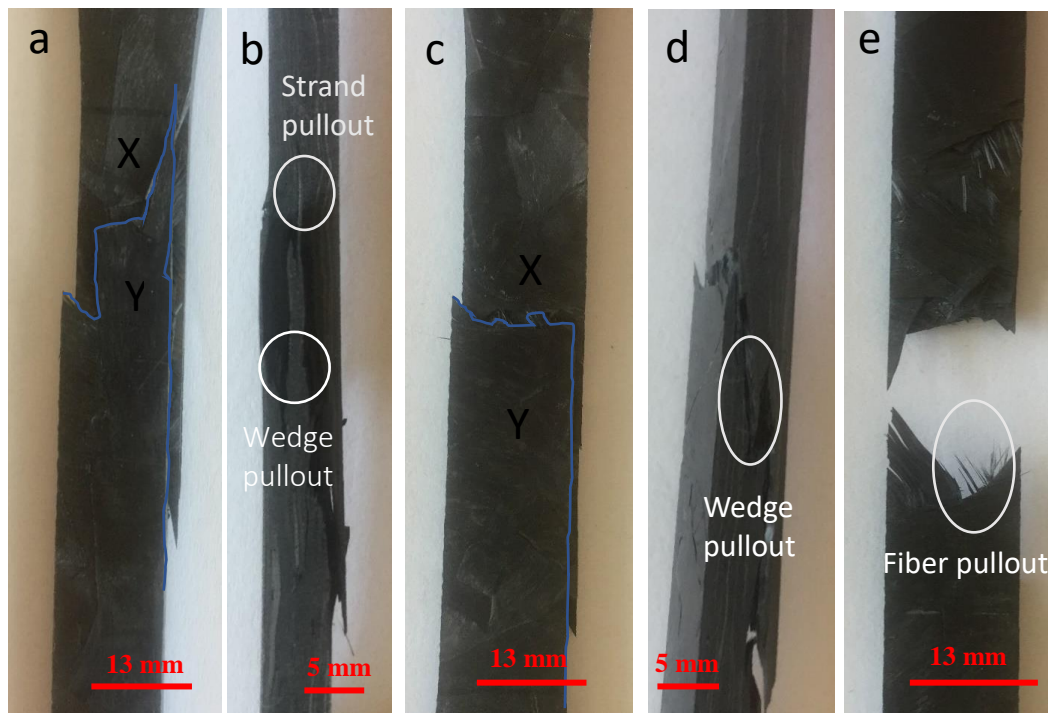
Macroscopic failure modes of the composites: a. front view of fracture surface; b. strand pullout and wedge pullout (mixed mode); c. relative sliding of fracture surfaces; d. wedge pullout; and e. fiber pullout
